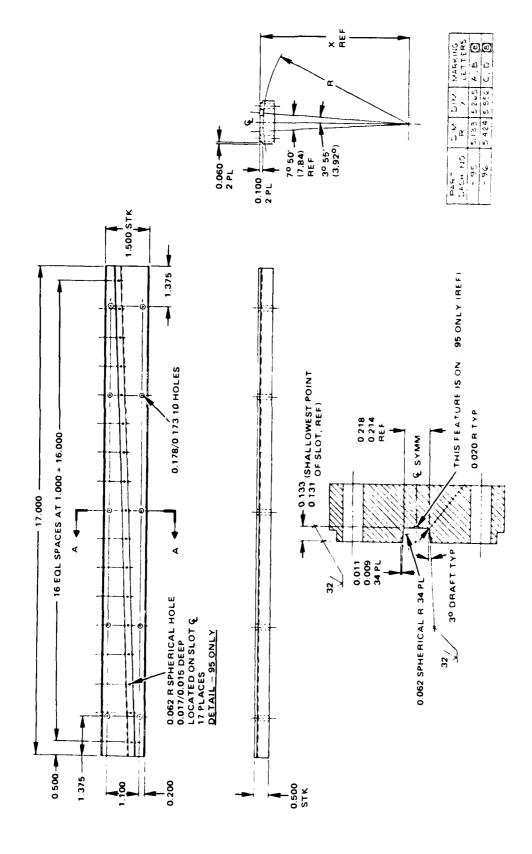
Skewed mold Dwg. No. 3707794 (Sheet 2 of 3).
